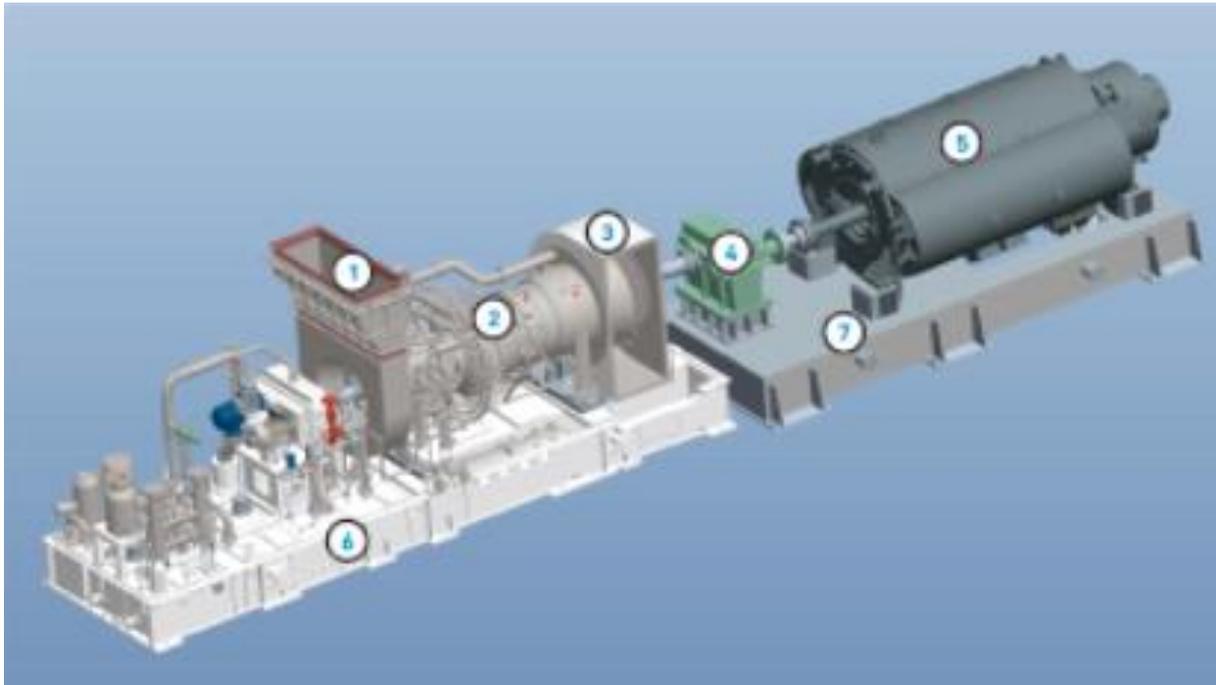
Core equipment of power unit: 1 - inlet fitting, 2 – engine, 3 - exhaust pipe, 4 – gear set, 5 – generator, 6 - engine frame, 7 – gear set and generator frame. [10]
